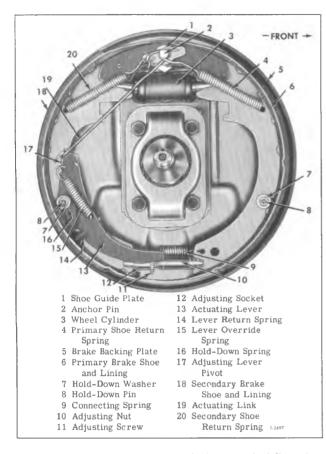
Duo-Servo Front Brake (Automatic Adjuster)
